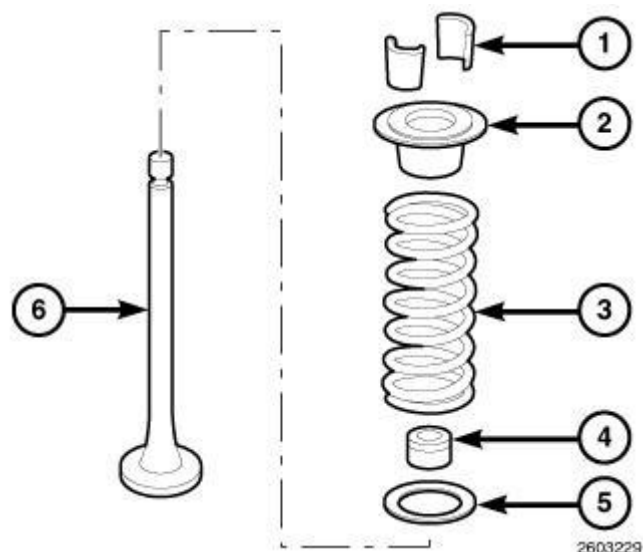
Valve Spring, Keeper, Retainer, Spring Seat, Valve Stem Seals & Valve
